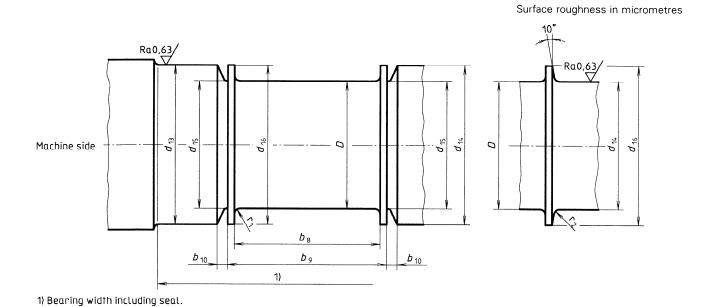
Shaft design for non-locating (free) bearing (thrust bearing part Q)
